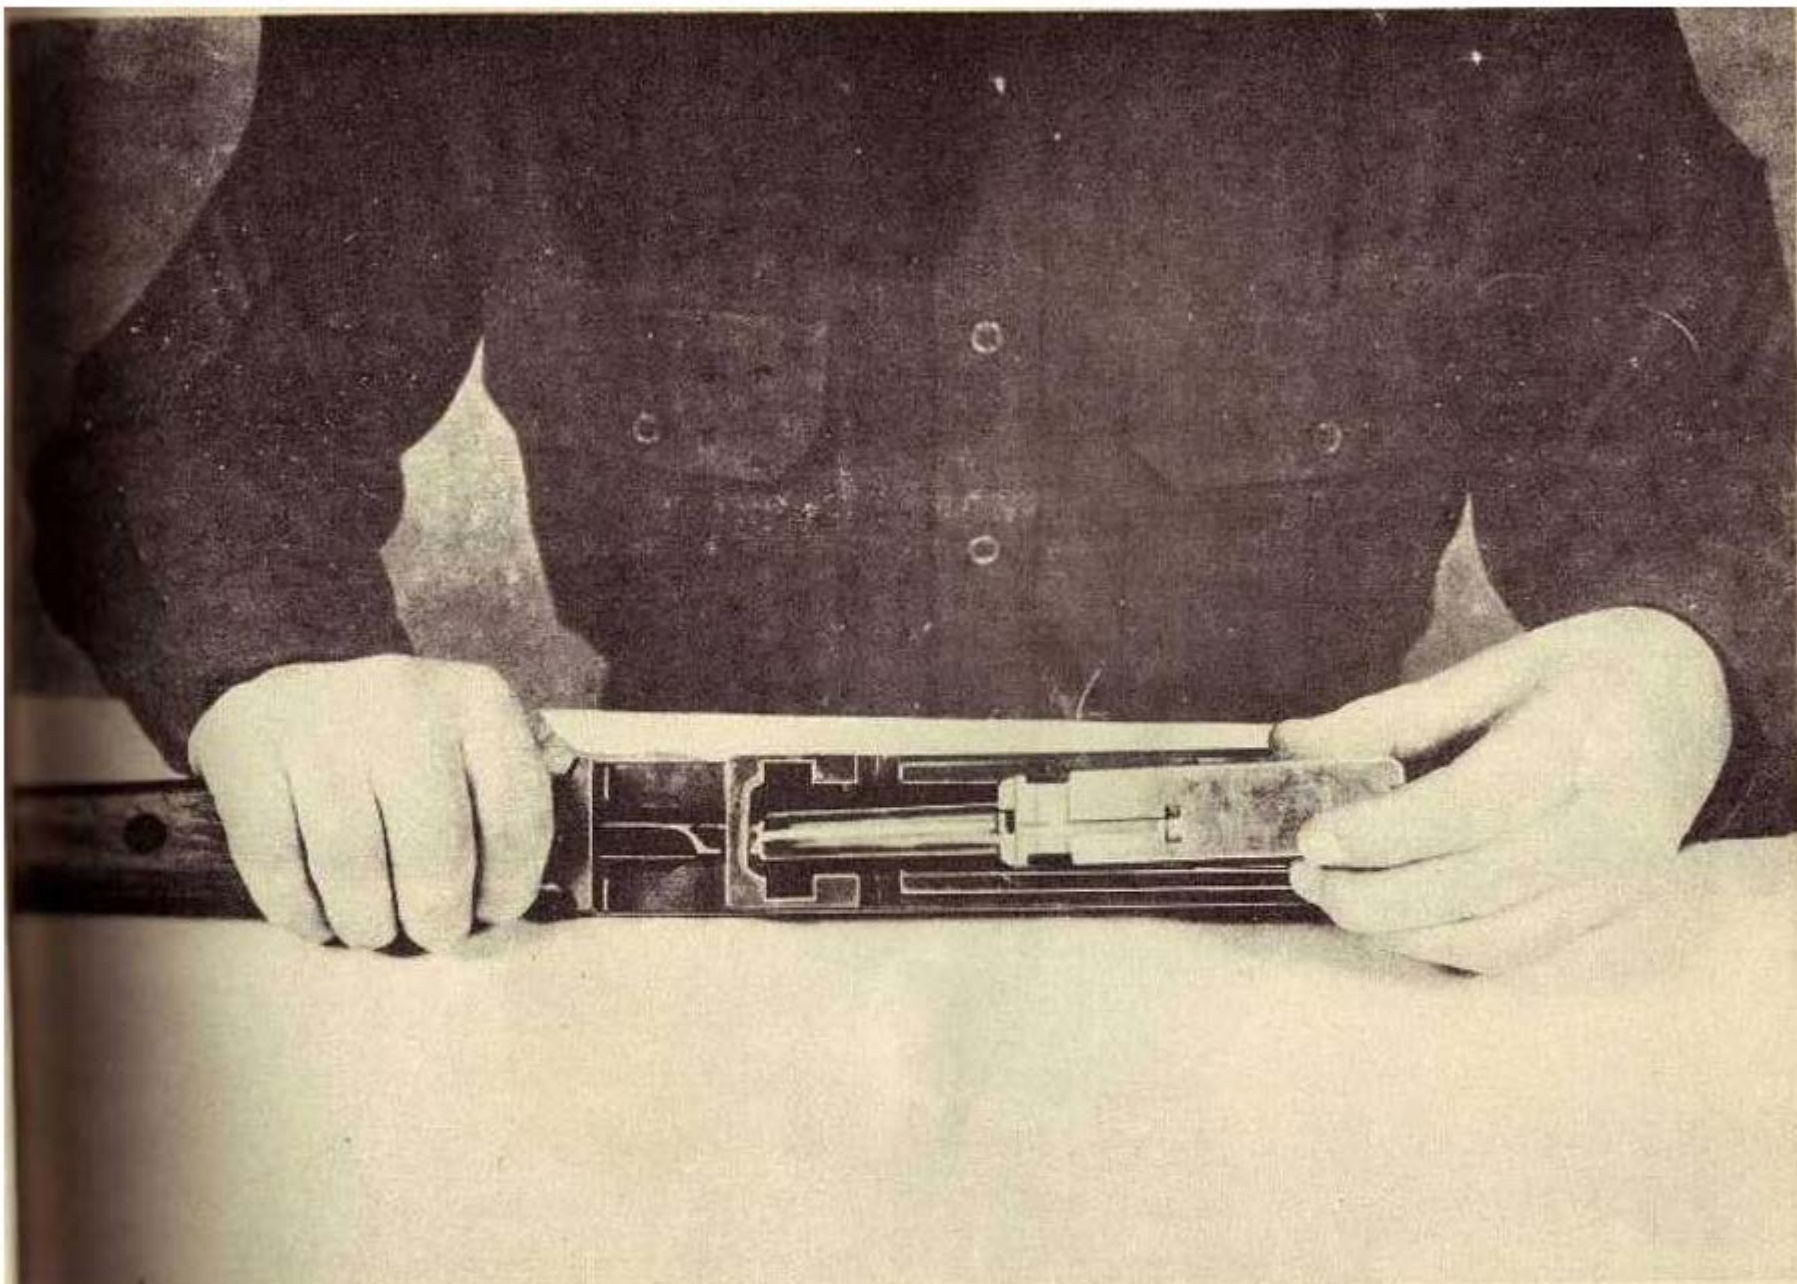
Slide recoiling parts to rear of RECEIVER and lift out BOLT.
